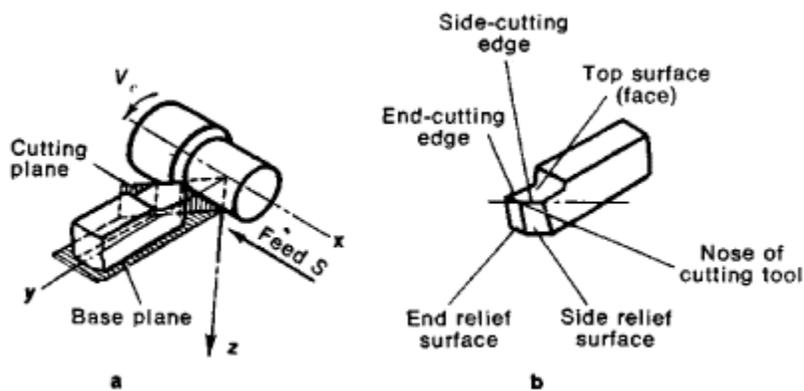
Diagram of the machining process (a) and the principal cutting-tool elements [12]
